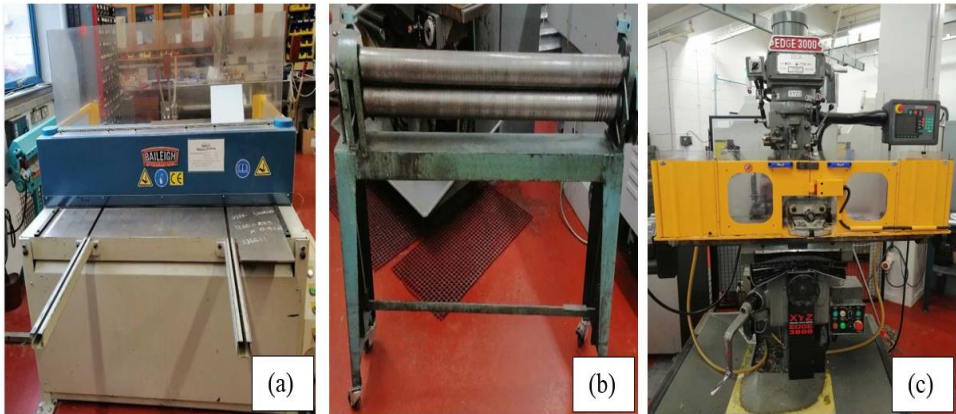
Specimen manufacturing machines (mechanical workshop)
